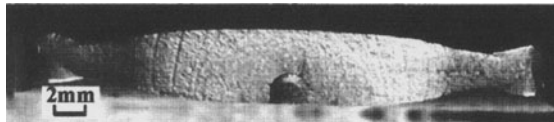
Crack morphology imprinted on a fracture surface.
